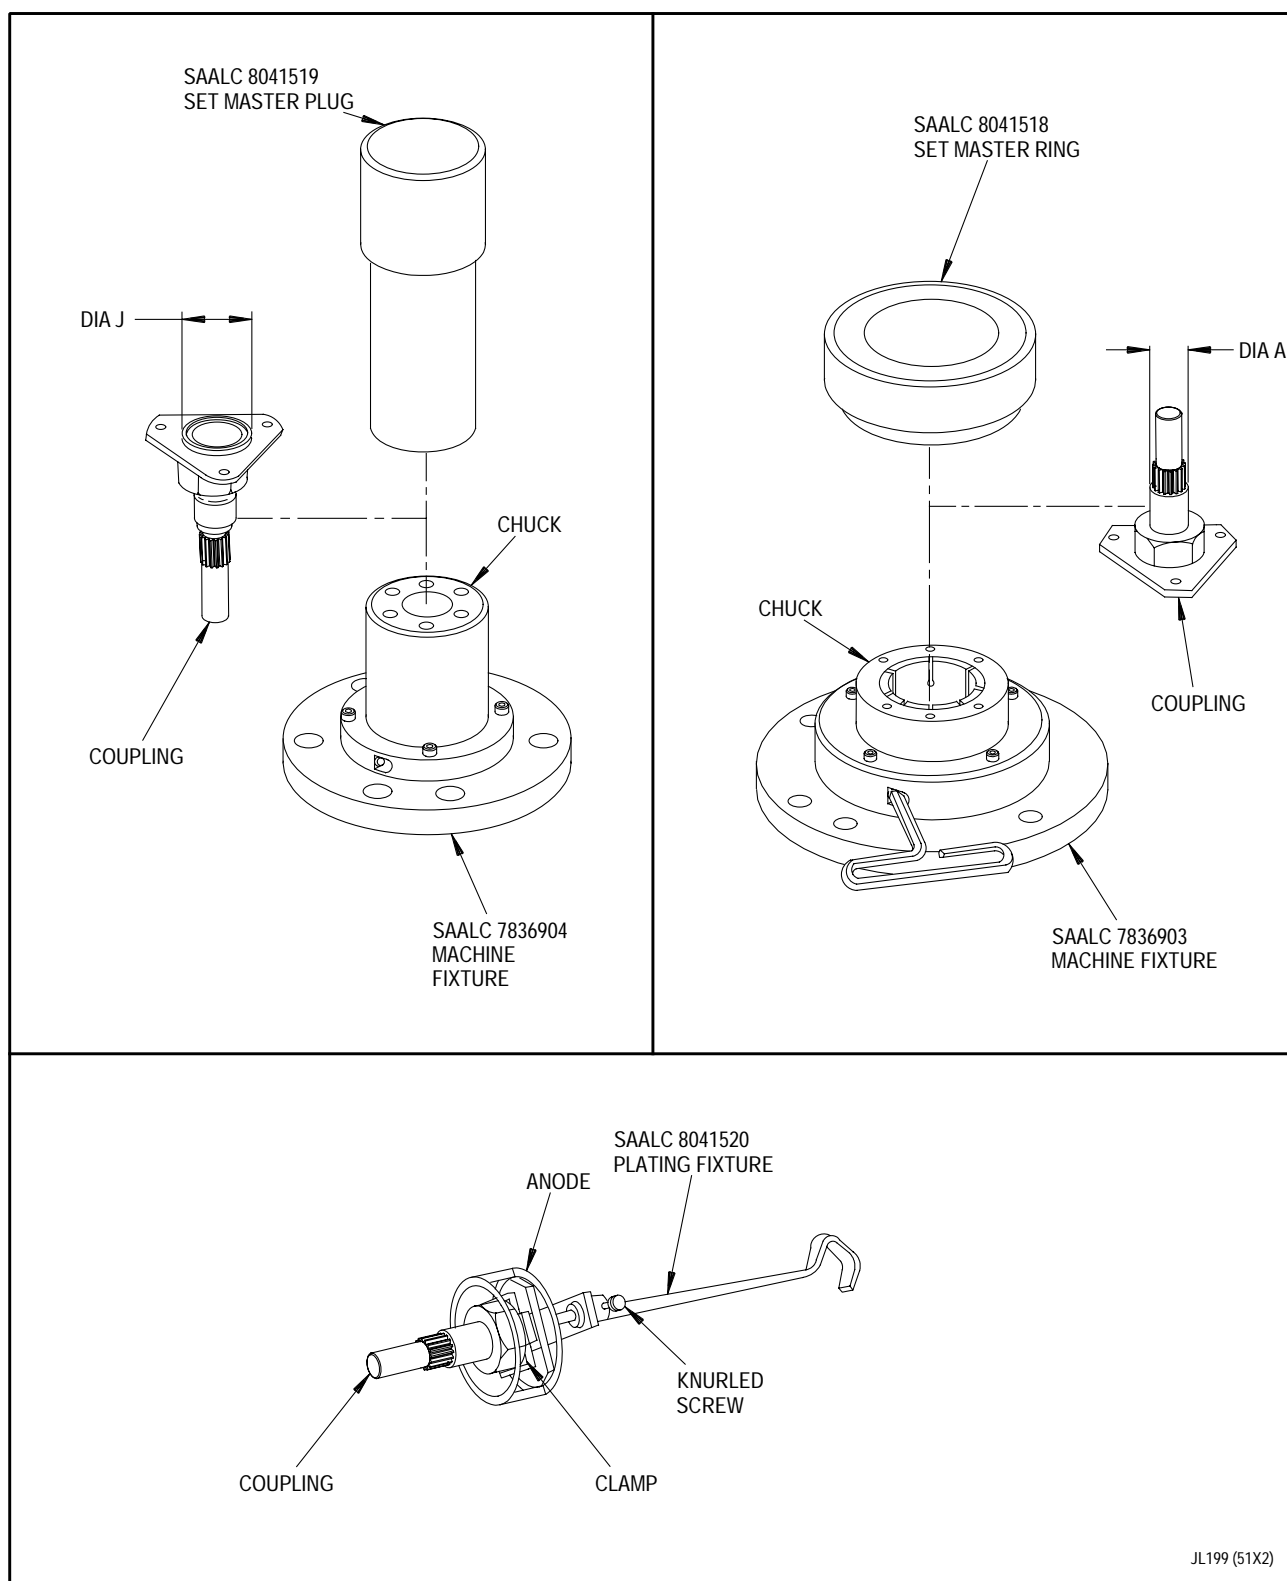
Remote Gearbox Driveshaft Coupling With Machining and Plating Equipment
